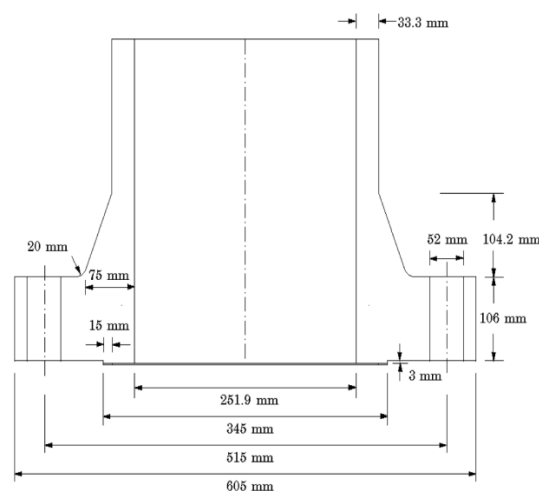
Flange geometry and dimensions (Estrada, 2015)
